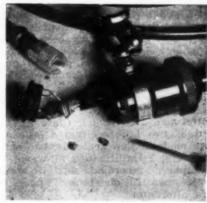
Details of lamp socket assembly. Cable and parts must withstand a breakdown potential of at least 2000 volts.
